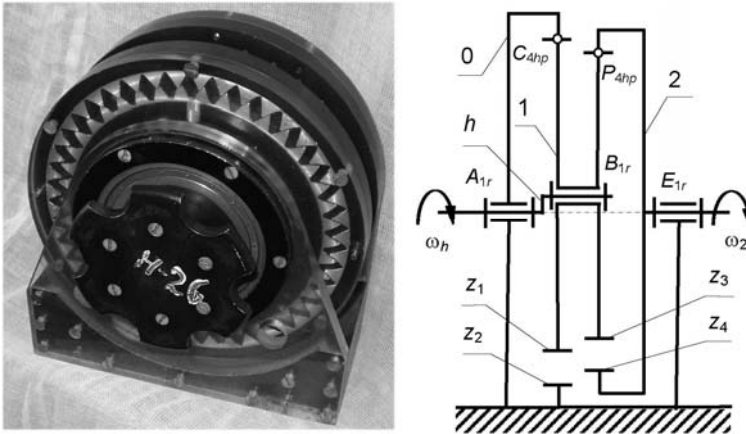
Model of a crank-planetary mechanism with a gear muff with internal involutes gearing
